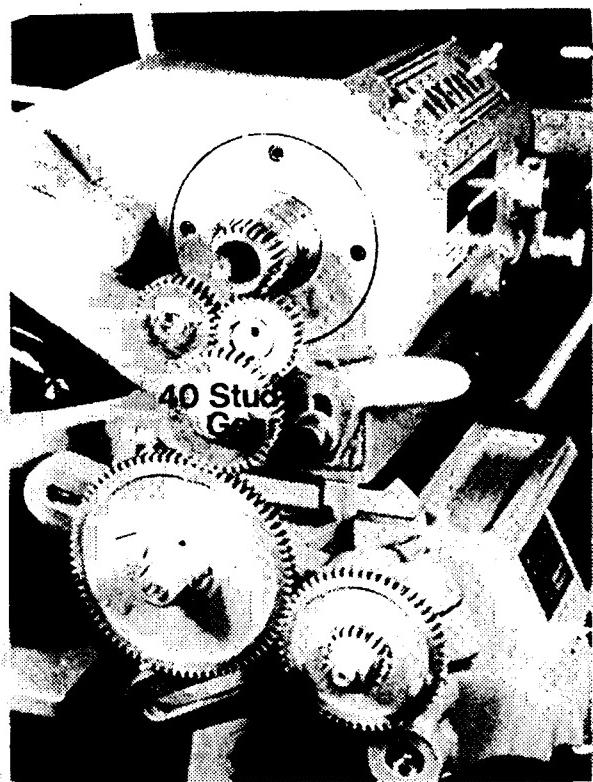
Bench Model Lathe with Gearbox Set Up to Cut Coarse Pitches (e.g. 4 to 7 T.P.I.)
